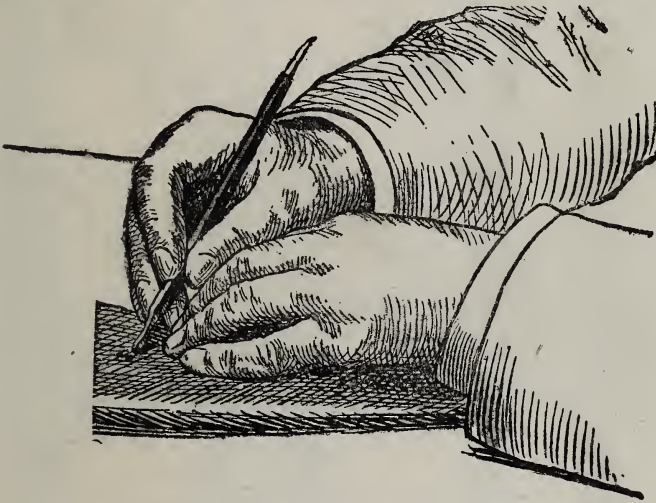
FIRST POSITION OF OUTLINING TOOL
